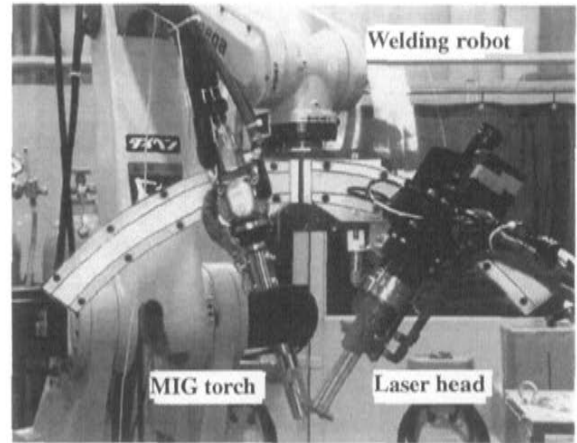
Experimental setup of YAG laser and AC pulsed MIG arc hybrid welding
